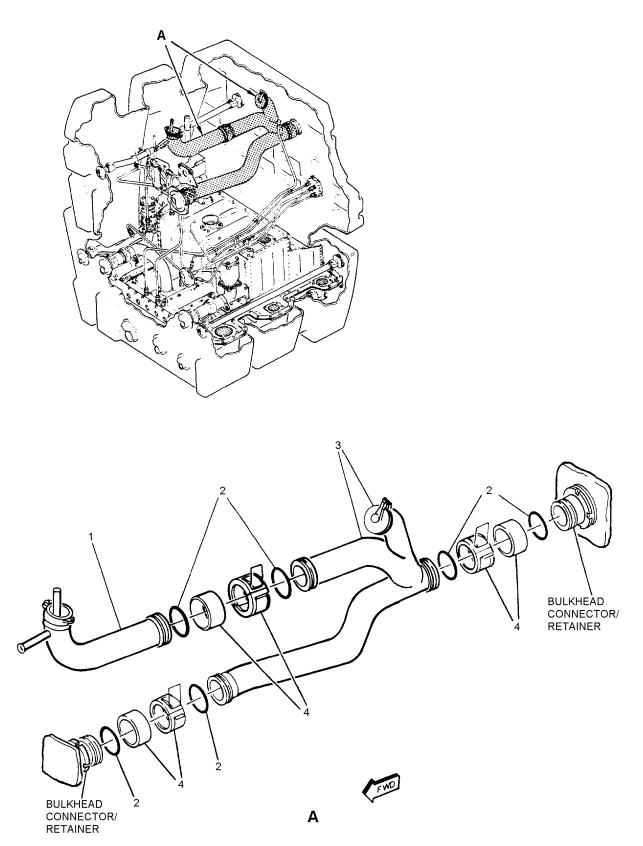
No. 3 Fuel Tank Dive Vent Check Valve (5VAP582) (Sheet 1)
